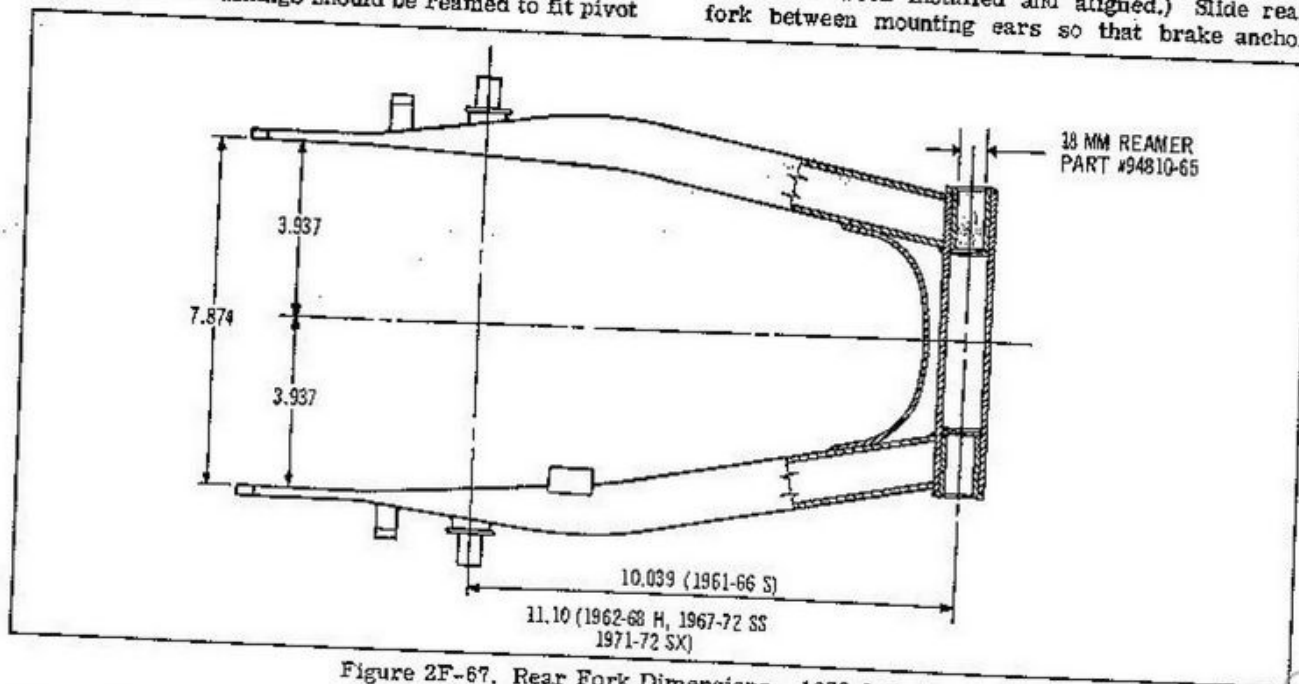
F-67. Rear Fork Dimensions - 1972 & Earlier
